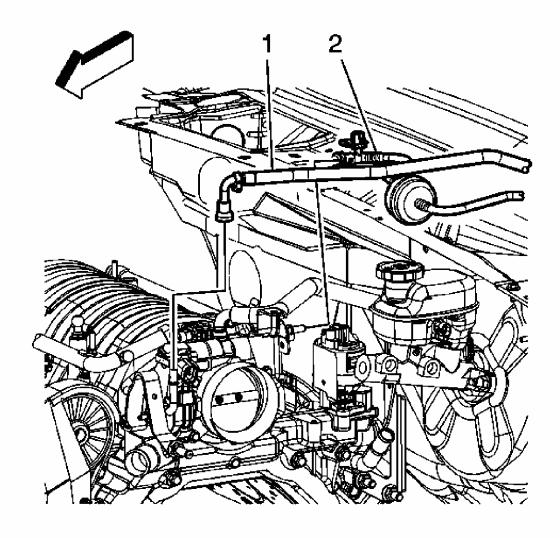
Identifying Fuel Feed Pipe & EVAP Line Quick Connect Fitting Courtesy of GENERAL MOTORS CORP.
